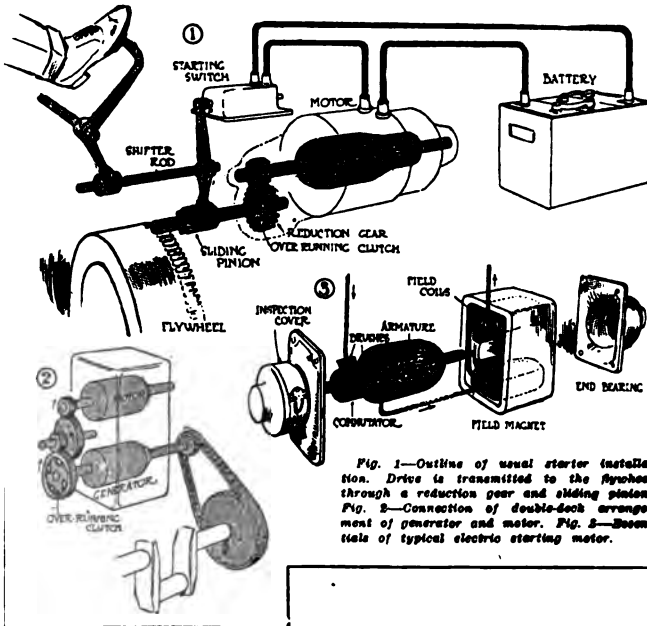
Outline of usual starter installation. Drive is transmitted to the flywheel through a reduction gear and sliding pinion. Fig. 2—Connection of double-shaft arrangement of generator and motor. Fig. 3—Essentials of typical electric starting motor.
